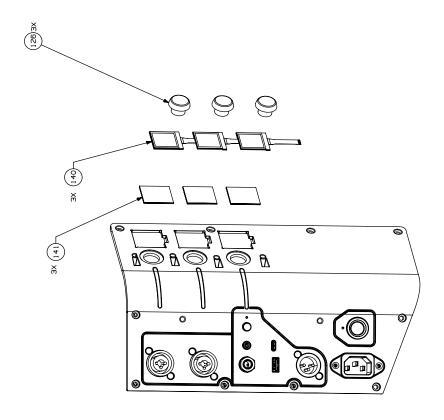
S1 PRO+ IO Panel Assy Exploded View
